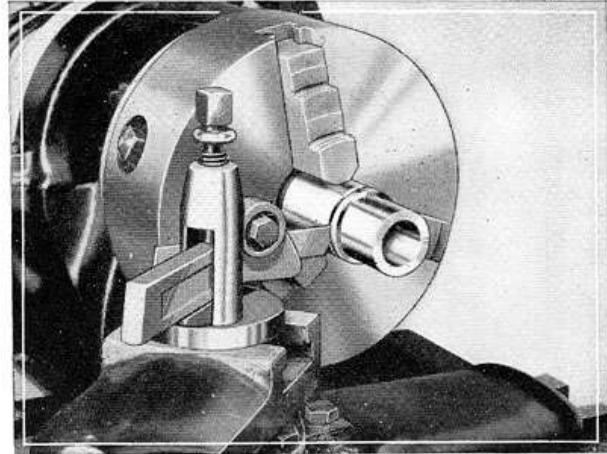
Cutting Off a Bushing that Has Been Machined Complete Without Removing from the Chuck.
